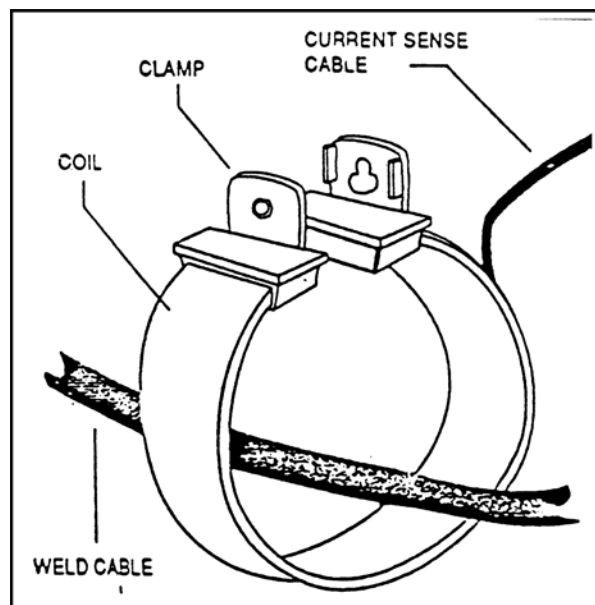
Current Coil Placed Over a Single Welding Cable
